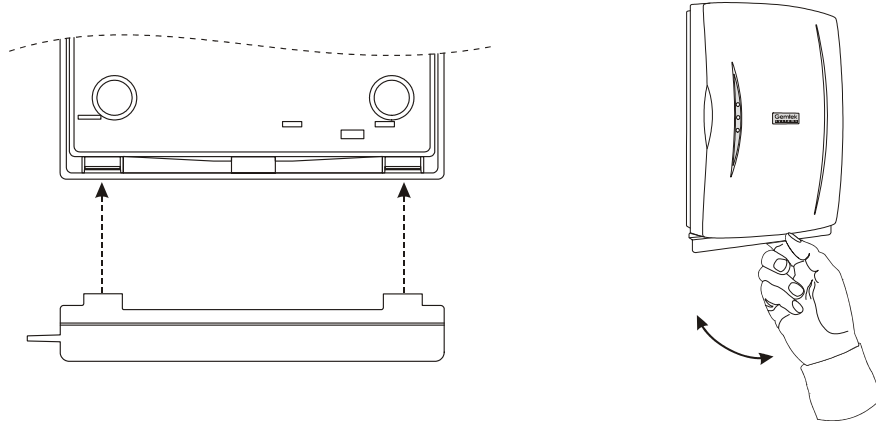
Removing the P-520 Housing Using the Disassembling tool
